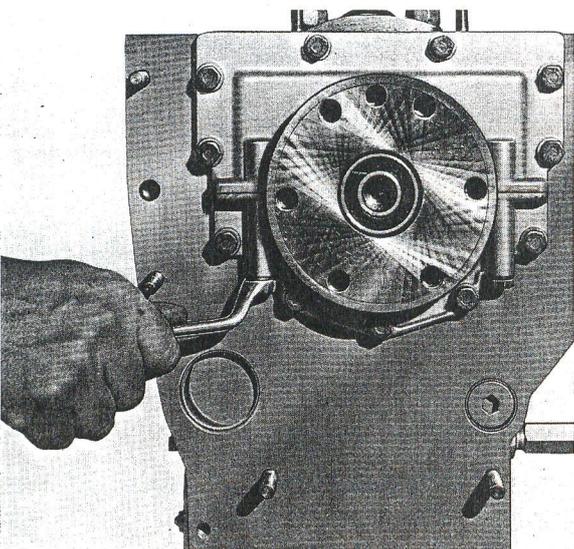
Rear bearing cap assembly being secured with screws onto the crankshaft.
